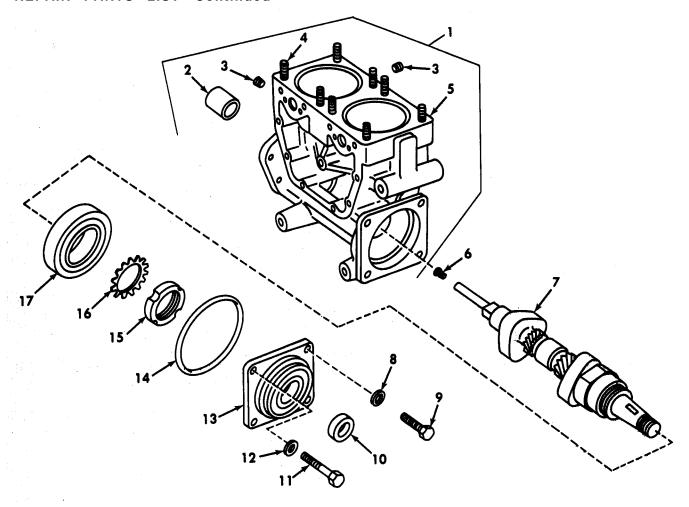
Housing, Camshaft, Plate, and Associated Parts.
